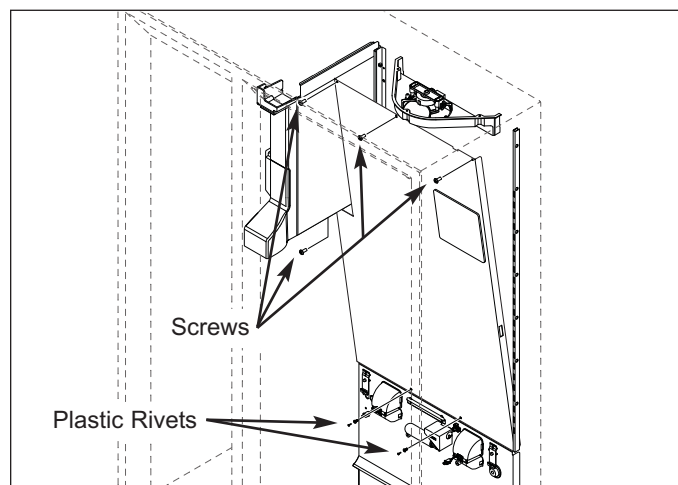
Control Panel Assembly Removal (viewed from behind)
